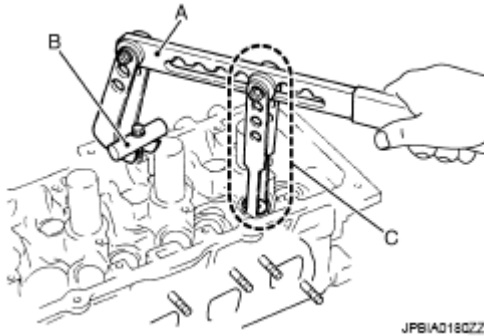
Compressing Valve Spring Using Valve Spring Compressor
